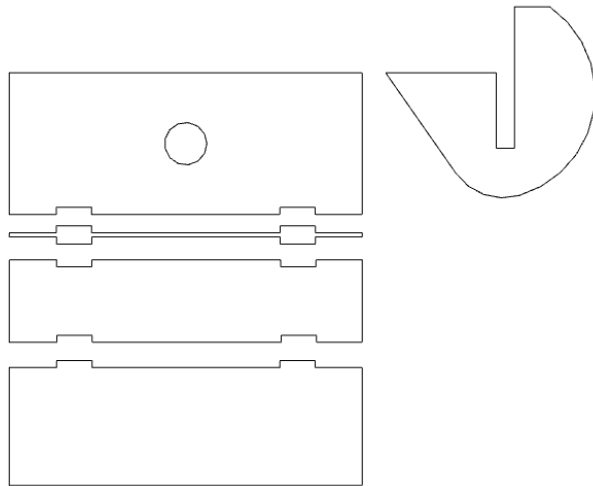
Third iteration gripper prototype components drawn in 2D, utilised for laser cutting of the parts.
